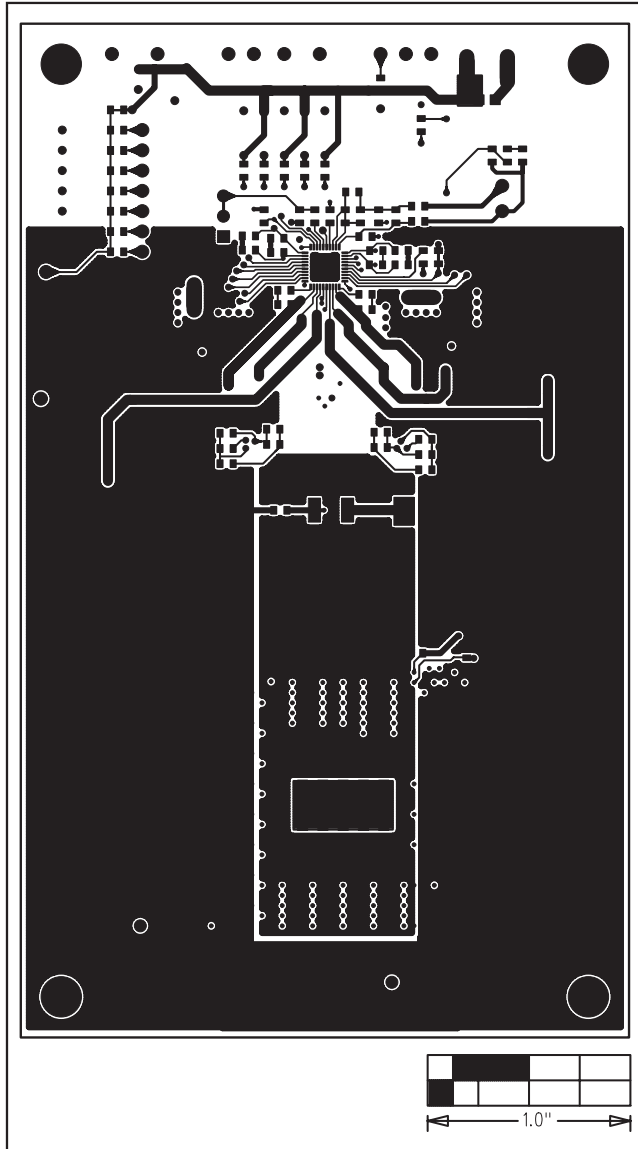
MAX17021 EV Kit PCB Layout—Solder Side
